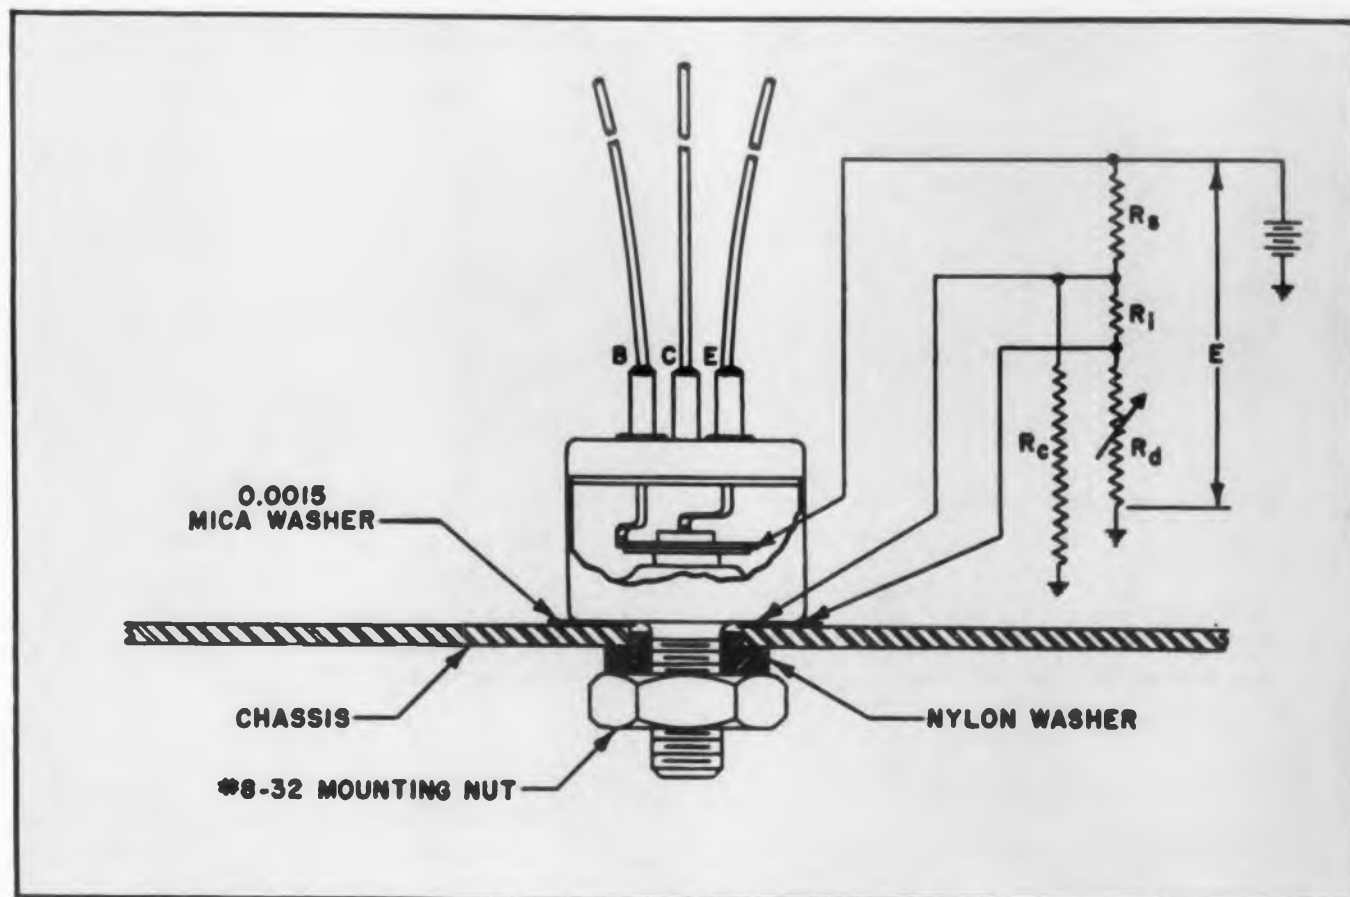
Power transistor mounted on a heat dissipator. Resistances to heat flow are shown.
